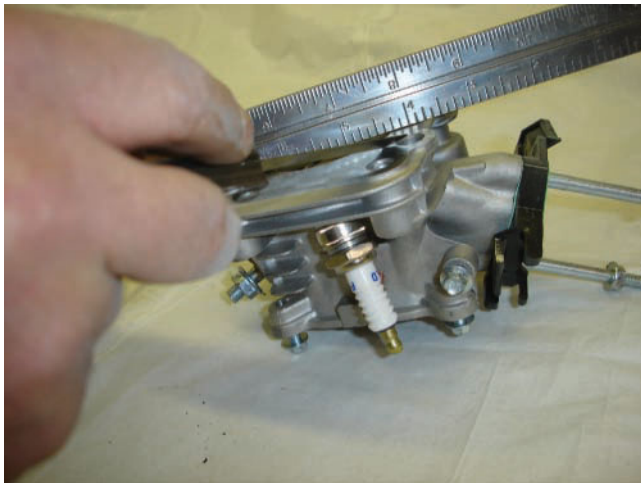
Checking the cylinder head for warpage using a feeler gauge and straightedge.
